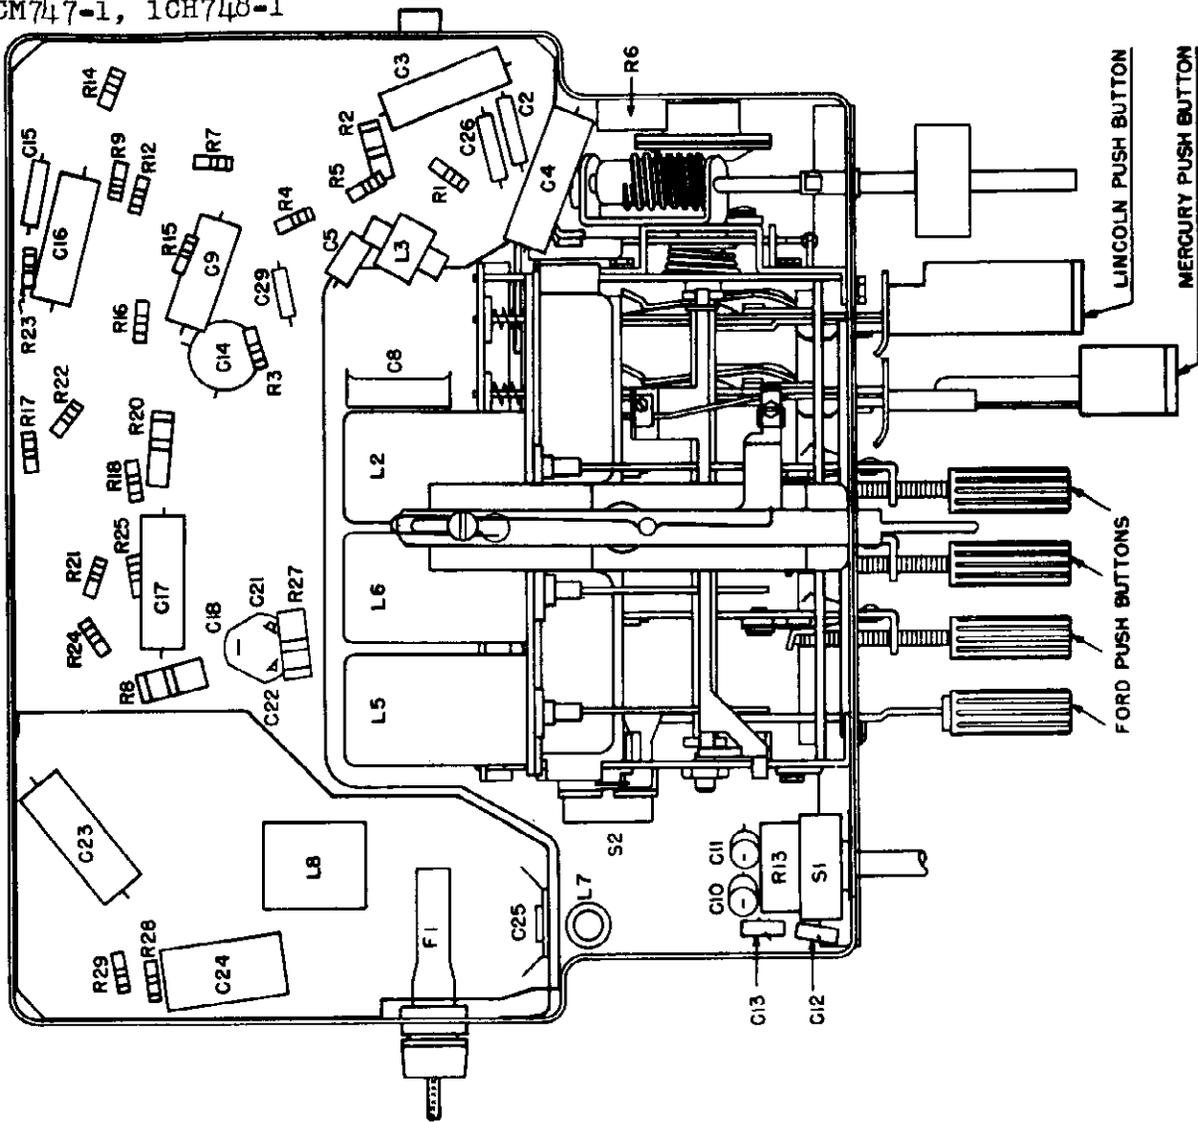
PARTS LAYOUT - TOP OF CHASSIS
